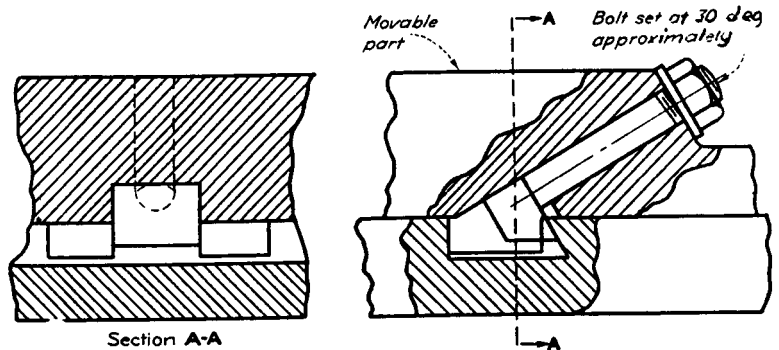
The lower edged of the bolt head contacts the angular side of locating groove, causing the keys to be held tightly against the opposite side of the groove. This design permits easy removal of the clamped part, but it is effective only if the working pressure is directly downward or in a direction against the perpendicular side of the slot.
